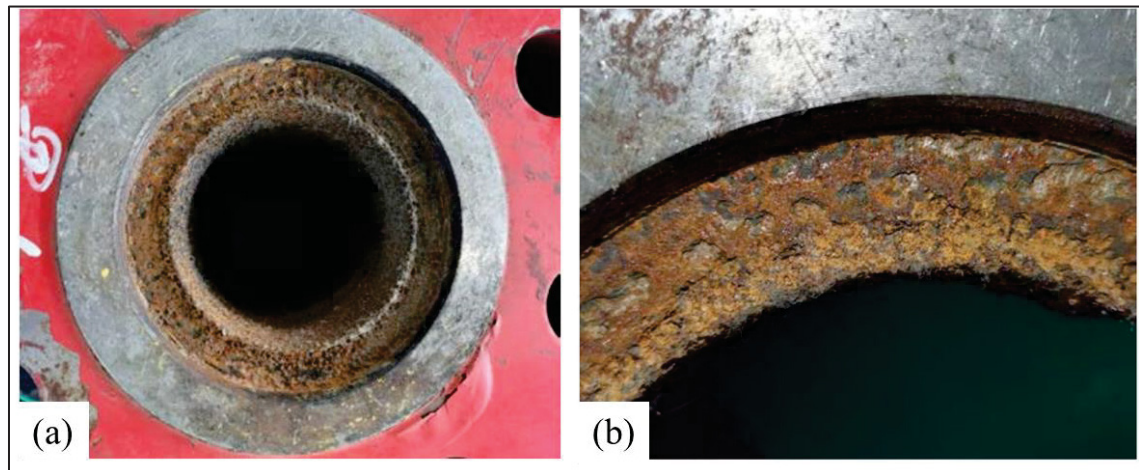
Macroscopic image of the corroded ASTM A105 flange; (a) corroded sealing groove; (b) magnified corroded sealing groove
